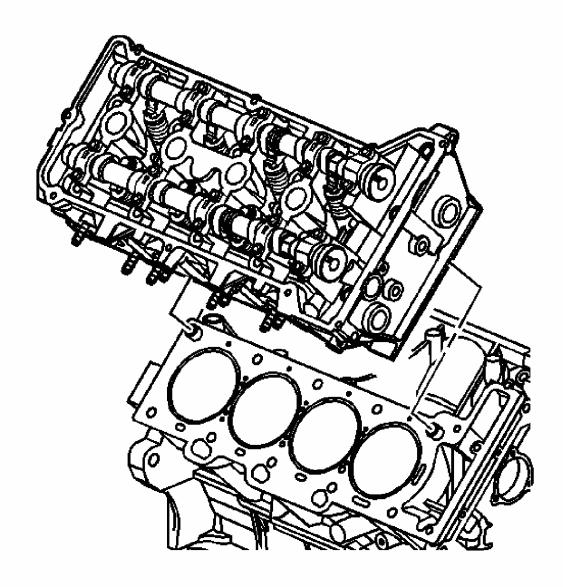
View Of Cylinder Head With Alignment Dowels - Right Courtesy of GENERAL MOTORS CORP.
